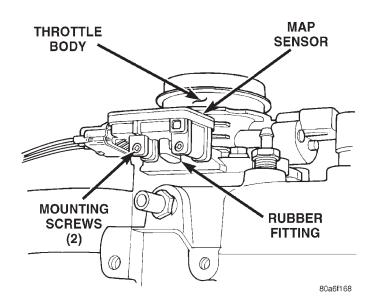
Rubber L-Shaped Fitting—MAP Sensor-to-Throttle Body
